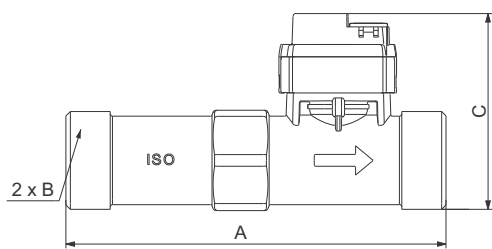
Dimensions, MFS QT 10-100 l/min, with threads
